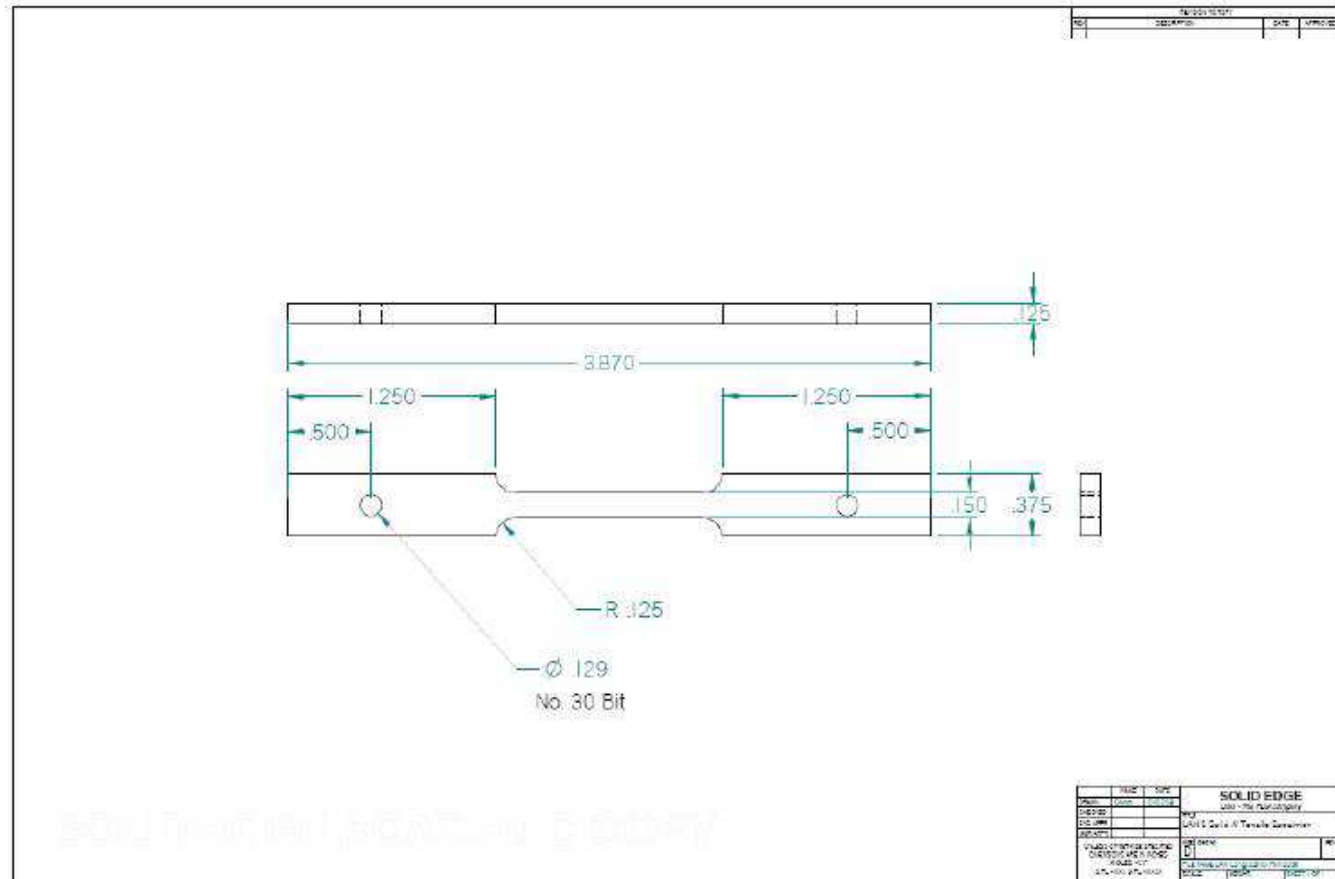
Nominal dimensions for bulk longitudinal tensile samples. All dimensions in inches.
